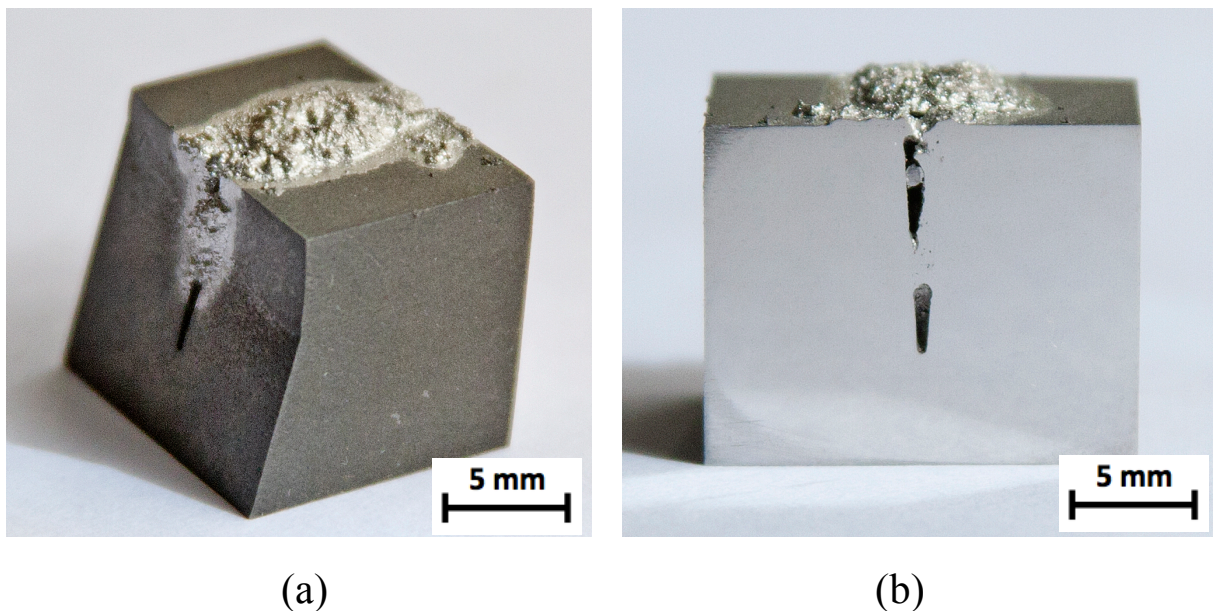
The first brazing trial sample: (a) after removal from the furnace and (b) a cross-section which showed incomplete filling.
